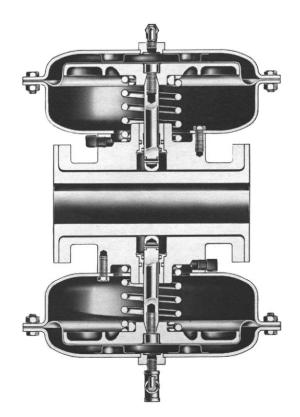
Mechanically operated unsupported sleeve pinch control valve Courtesy of Emerson Process Management
